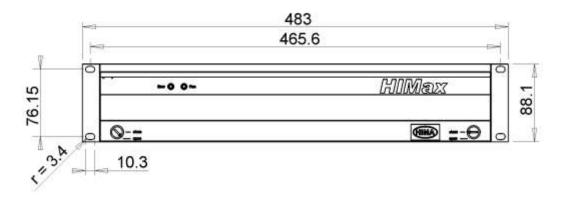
Dimension Drawing for System Fans 15 02 and 15 04
